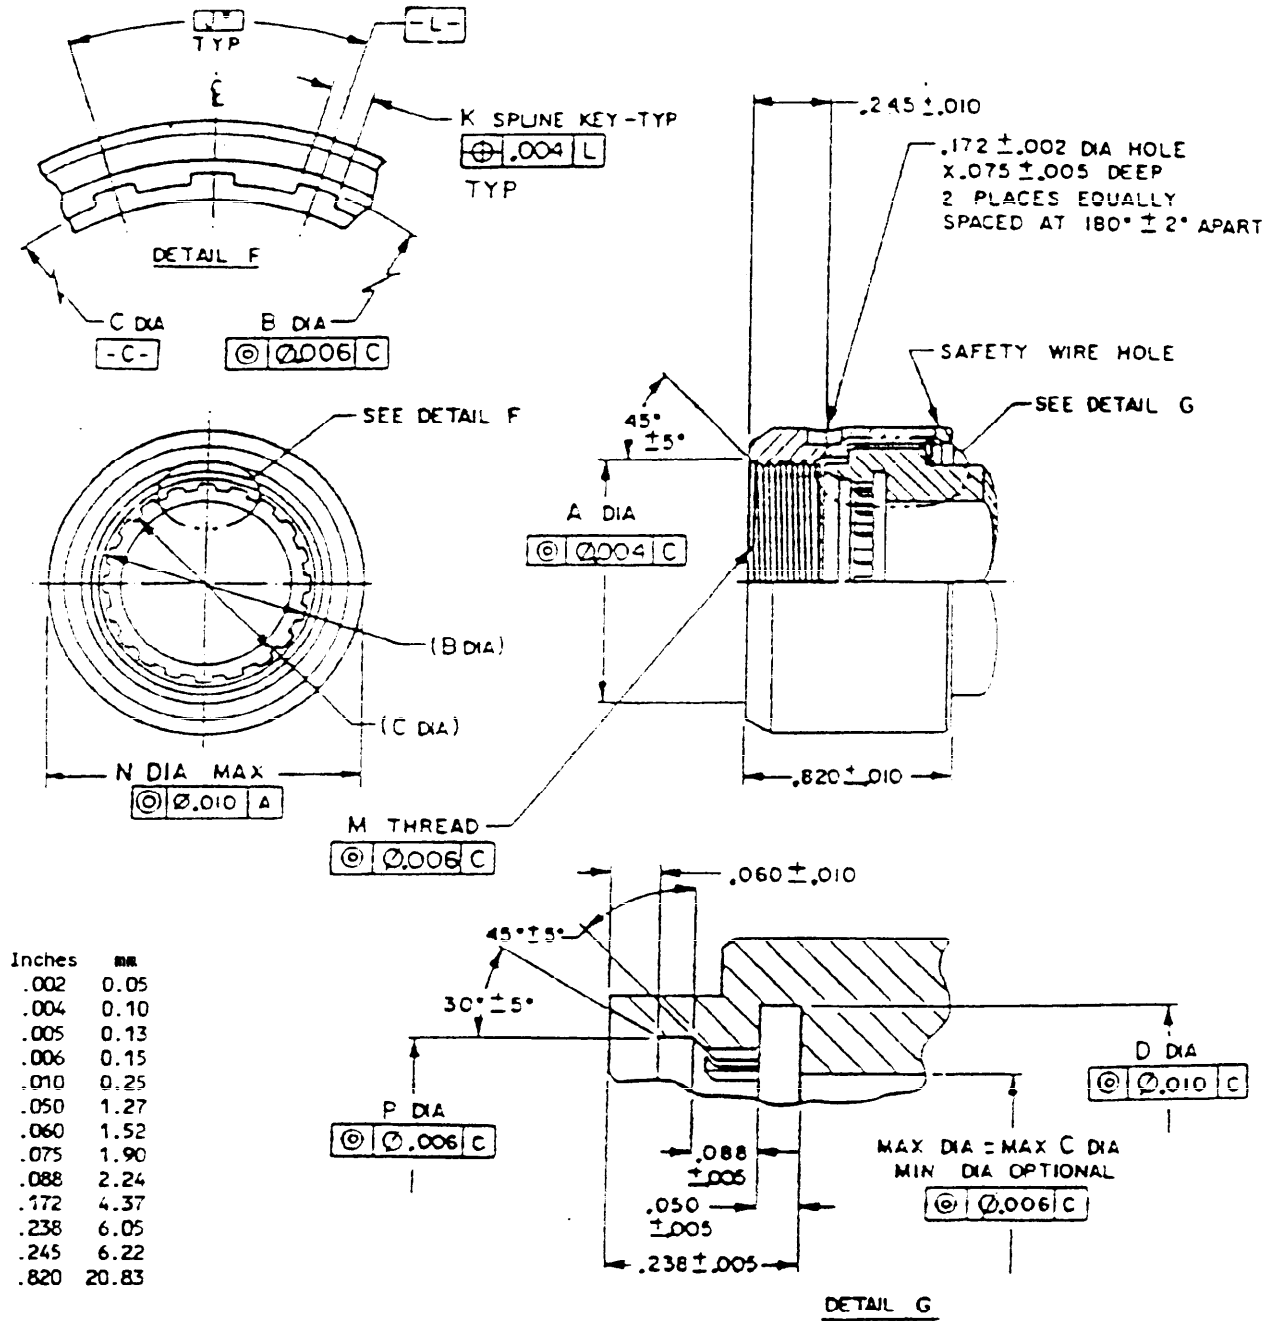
Interface dimensions, connector, fiber optic strain relief assembly attachment.
